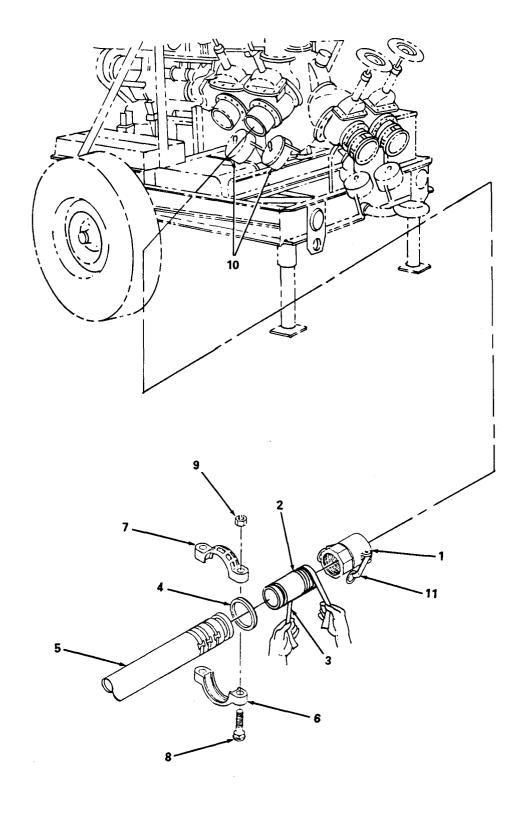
Attaching Discharge Hoseline to Pumping Assembly.
